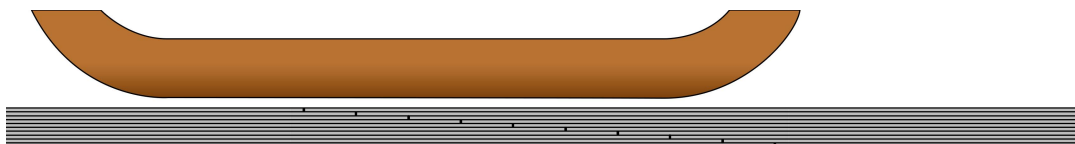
Second position of the coil used to weld the STI specimen
